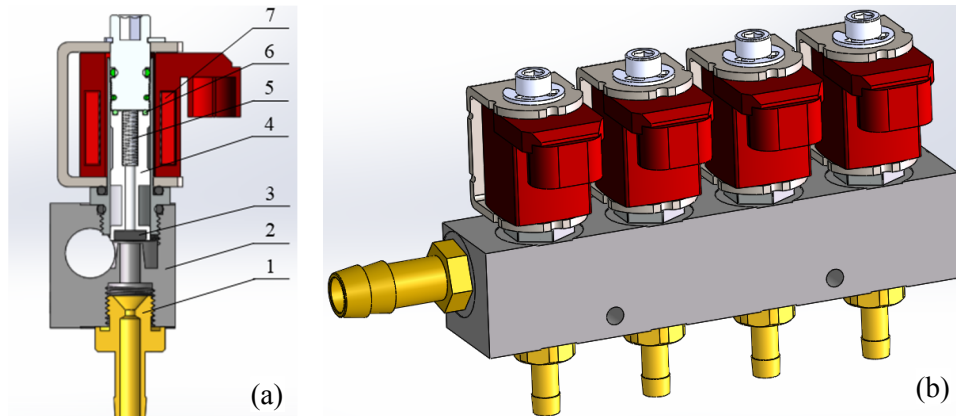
Section view of an injector (a) and injector assembly for 4 cylinder engine (b): 1 – Nipple with calibrated orifice; 2 – Fuel rail; 3 – Rubber insert; 4 – Needle; 5 – Spring; 6 – O-ring; 7 – Coil.
